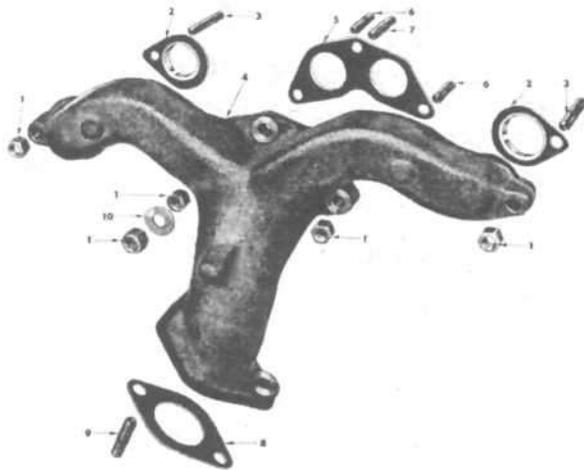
MODEL F4-134 EXHAUST MANIFOLD
